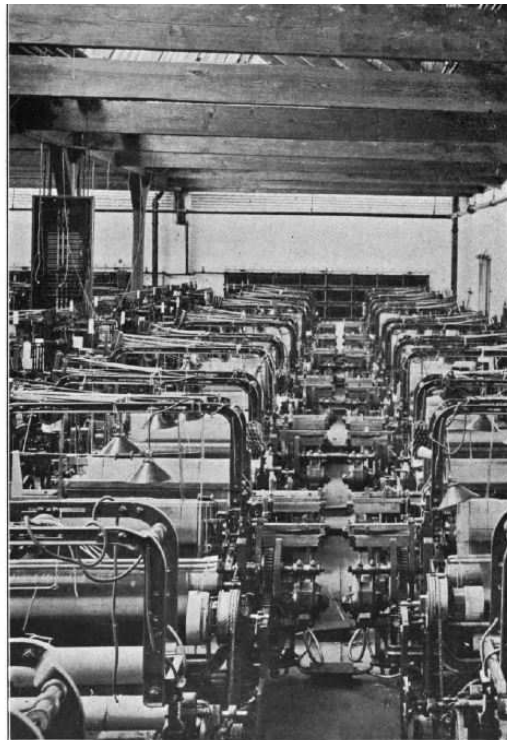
PLATE B.—THE SAME SILK-WEAVING SHED WITH MOTOR DRIVE.
